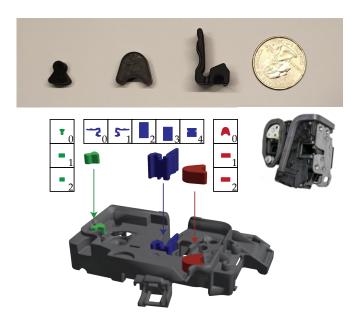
Top: (left to right) Small Bumper, Medium Bumper, Long Bumper, and a US quarter for scale. Bottom: The assembly task discussed in this work. Three rubber parts need to be inserted into the housing (black): small bumper (green), medium bumper (red) and long bumper (blue.) The top view of the stable poses is shown in the figure. Pose 0 for all objects is considered to be the assemblable pose.
